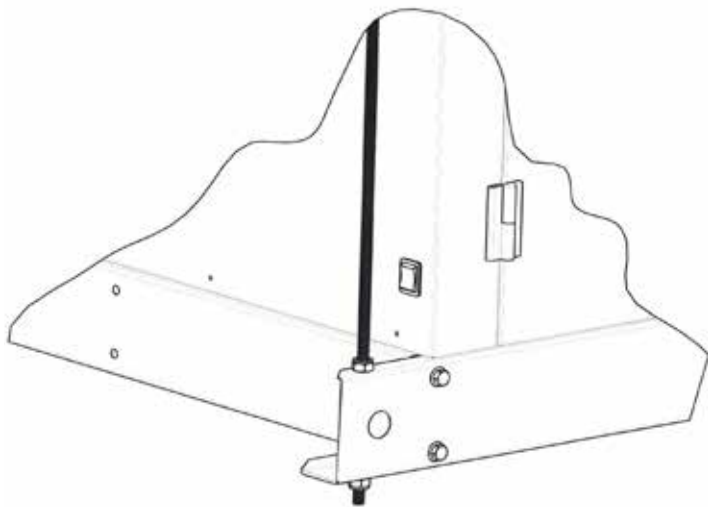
Detail fixation (only if unit and framework is a one-part construction)
